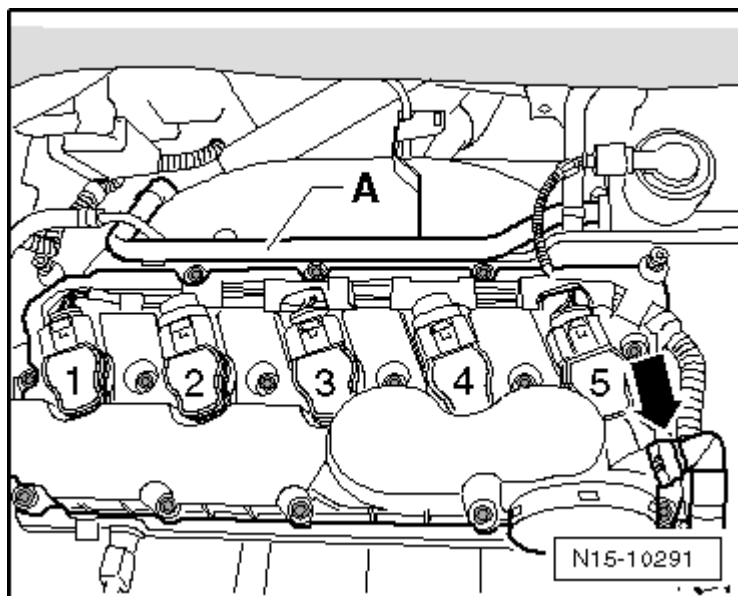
Identifying Air Hose Of Crankshaft Housing Ventilation, Connecting Pipe & Ignition Coils
